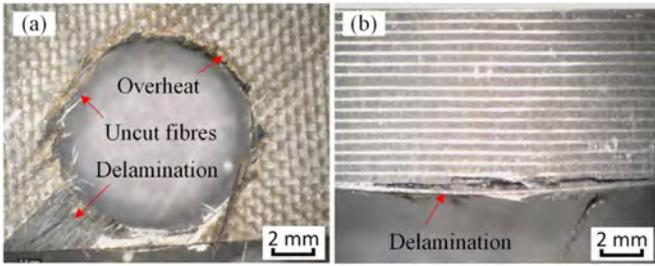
Delamination and tearing damage at the rotary ultrasonic elliptical machining of thick CFRP hole exit [49]: (a) surface topography; (b) cross sectional observation.
